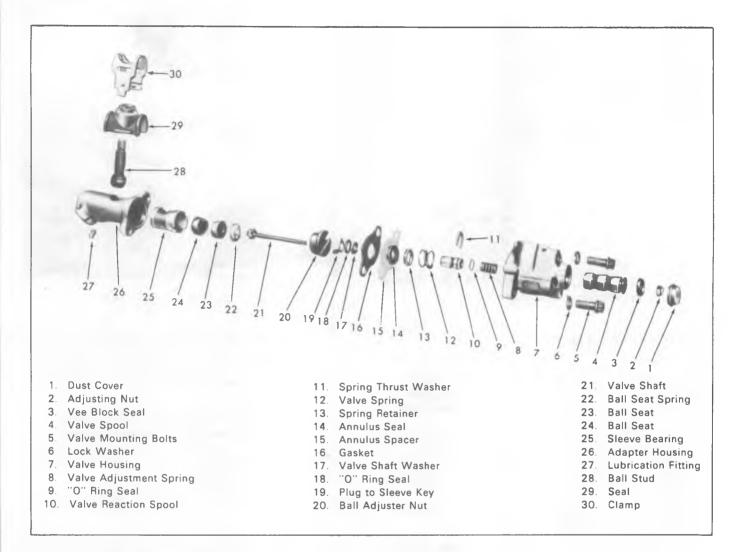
Power Steering Control Valve and Adapter--Exploded
